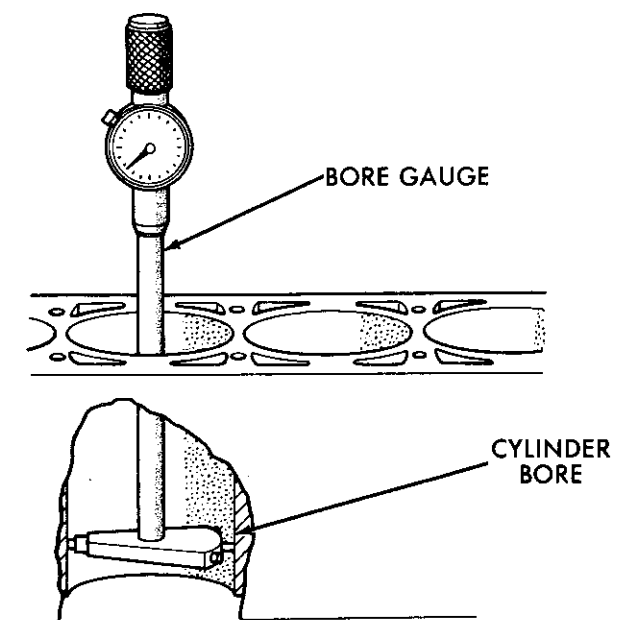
Measuring Cylinder Bore with a Bore Gauge
